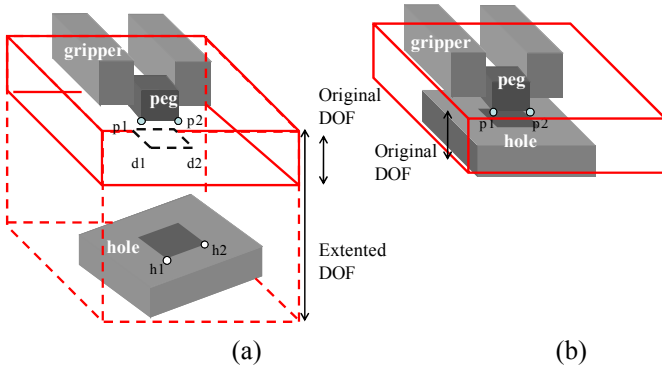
Microrassembly scheme using adaptive DOF, (a) coarse assembly and (b) fine assembly
